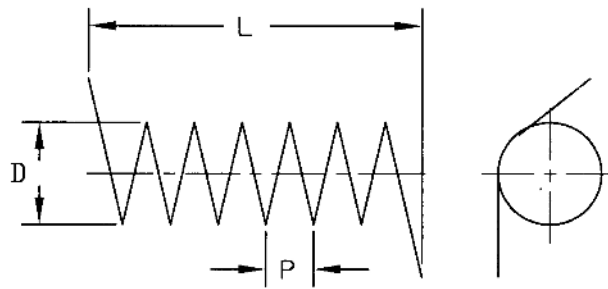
Schematic Drawings of Helical Torsion Spring
